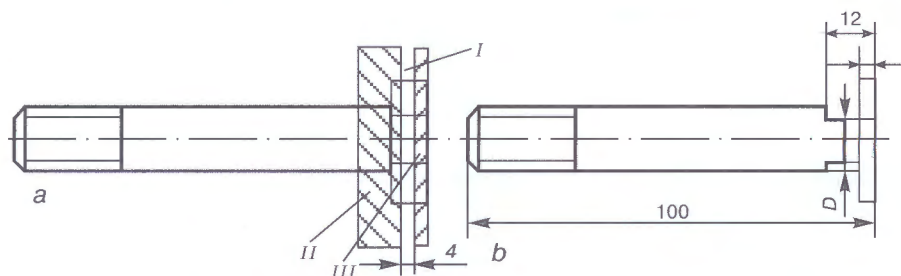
Schematic of samples produced by the braze-welding method: *a* — samples prepared for machining; *b* — samples after machining; I — zone 1 mm wide, which is to be removed by machining; II — zone 8 mm wide, which is to be turned to a diameter of 8 mm (an increase in the width of turning towards thread); III — braze-welded joint
